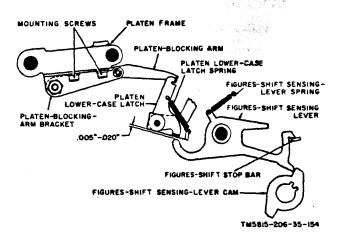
Platen-blocking-arm bracket adjustment (TT-4B/TG).
